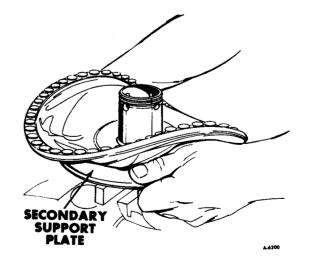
Locking or Unlocking Secondary Support Plate and Secondary Power Piston
